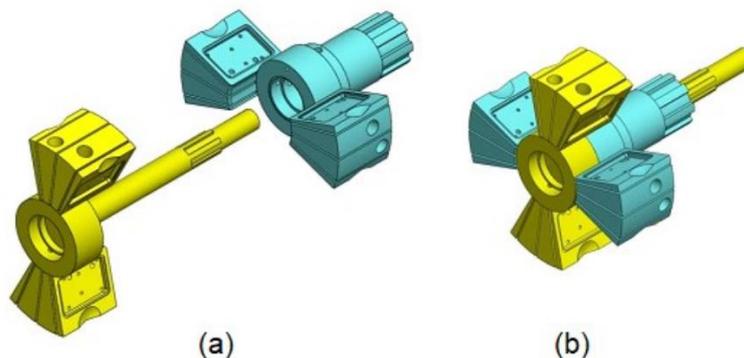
Rotors and pistons of a TRPE: (a) Exploded view, (b) Mounted in place (Oliveira, 2019).
